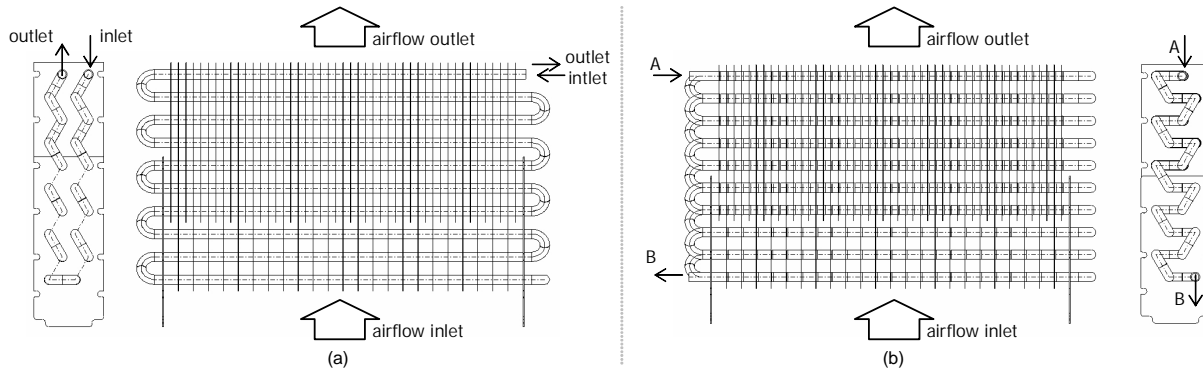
Finned-tube evaporators: (a) standard design; (b) proposed design
